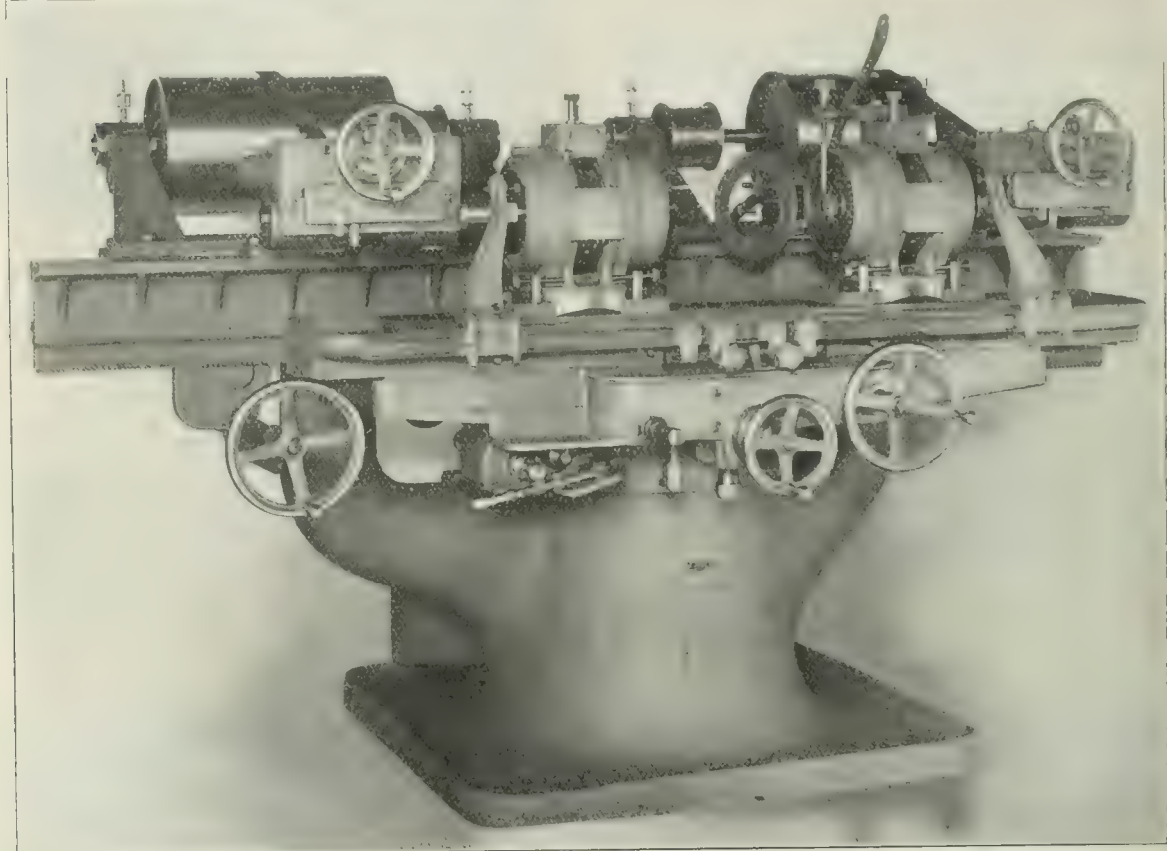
The Improved No. 5 Duplex Internal Grinder Built by the Bath Grinder Company, Fitchburg, Mass.
